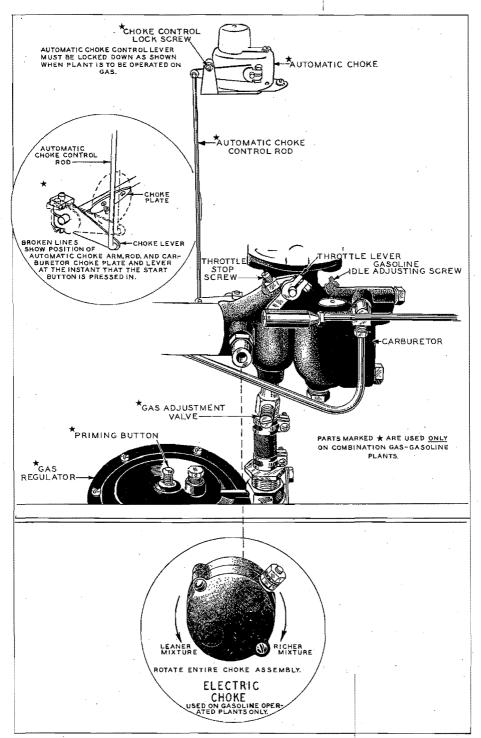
FIG.B-CARBURETOR AND CHOKE ADJUSTMENT
